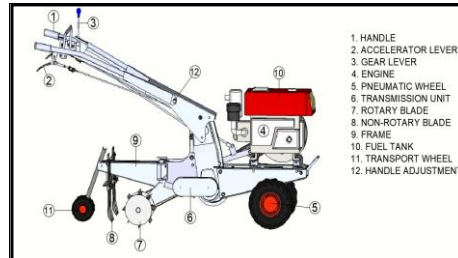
CAD Model of Self-Propelled Power Weeder with Developed Blade Assembly
